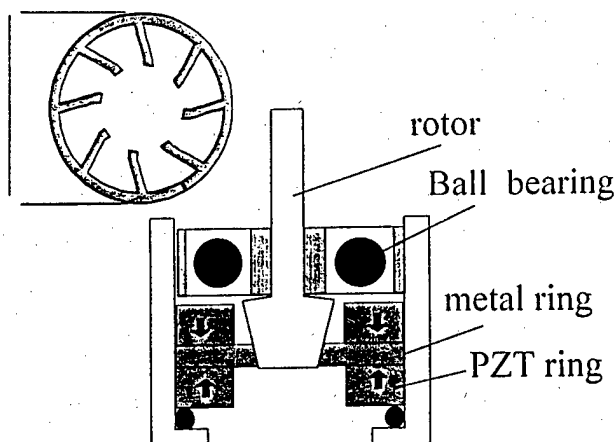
Compact ultrasonic motor with a "windmill"-shaped torsional coupler.
